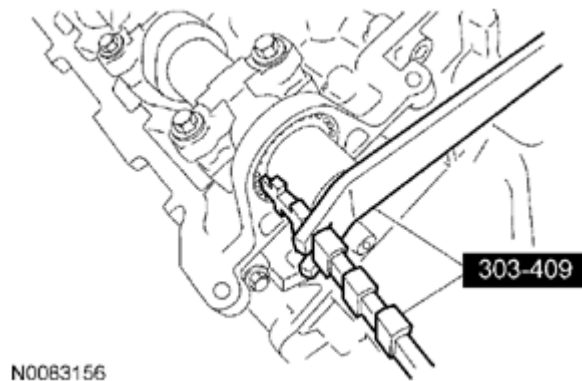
Removing Camshaft Oil Seal Using Oil Seal Remover
